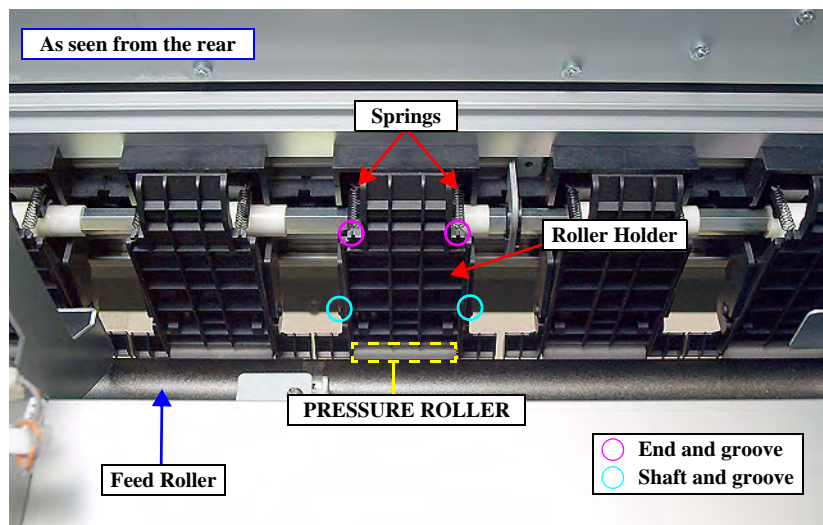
Removing the PRESSURE ROLLER with the Roller Holder
